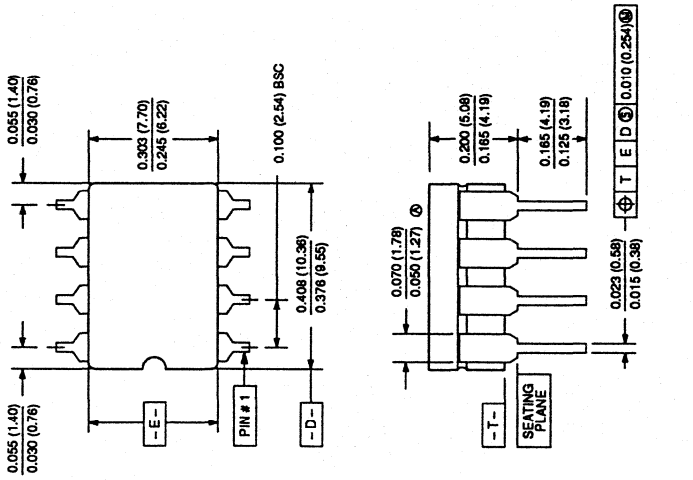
8-pin (300 mils wide) ceramic dual in-line (F) package (DWG 0580A).
